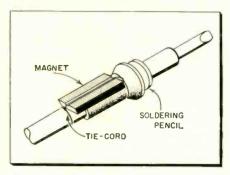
Magnet holds solder iron to chassis, metal rack, etc., for safety and convenience.
